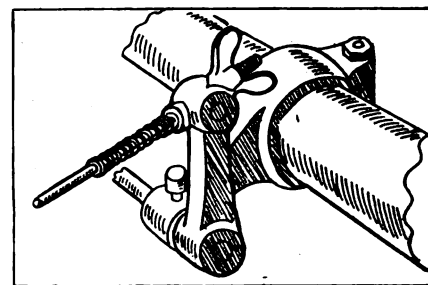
Modern form of brake adjustment which may be installed with spare parts
